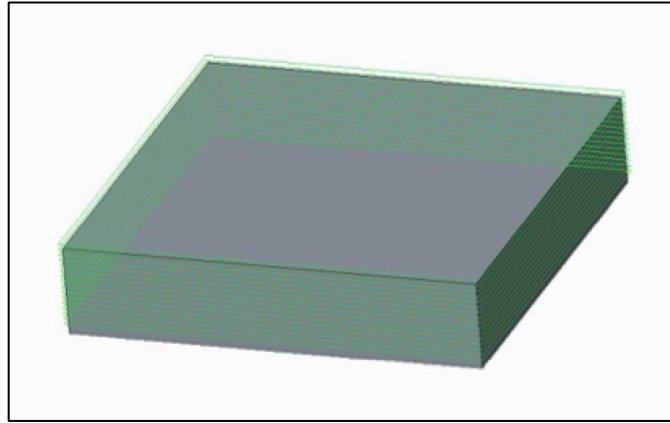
8. 3-D model of CT image specimen 16-U-0BP with 16 datum planes shown in green.
